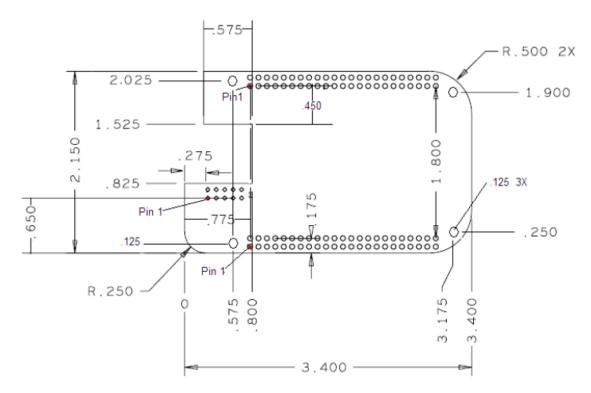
DEV-RF002 Module Mechanical Dimensions
